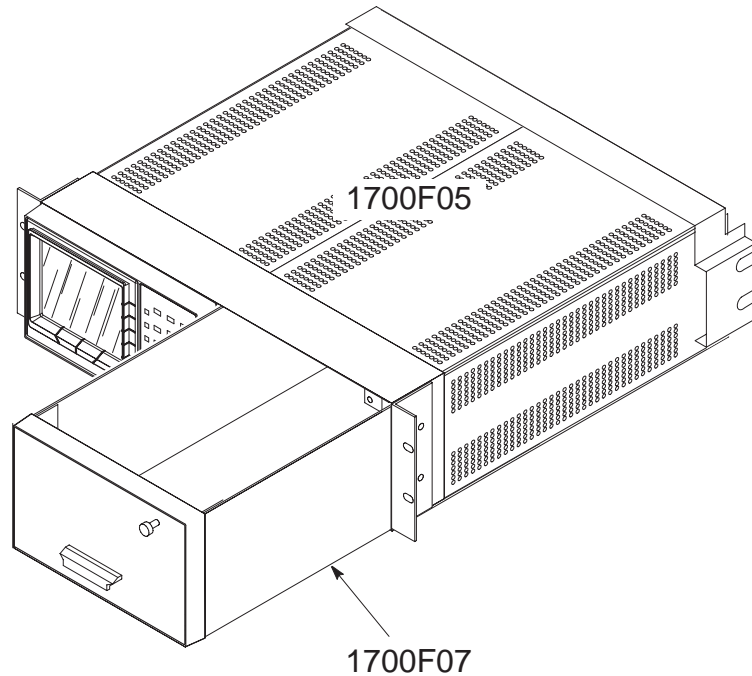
1700F05 Rack Mounting with a 1700F07 Utility Drawer
